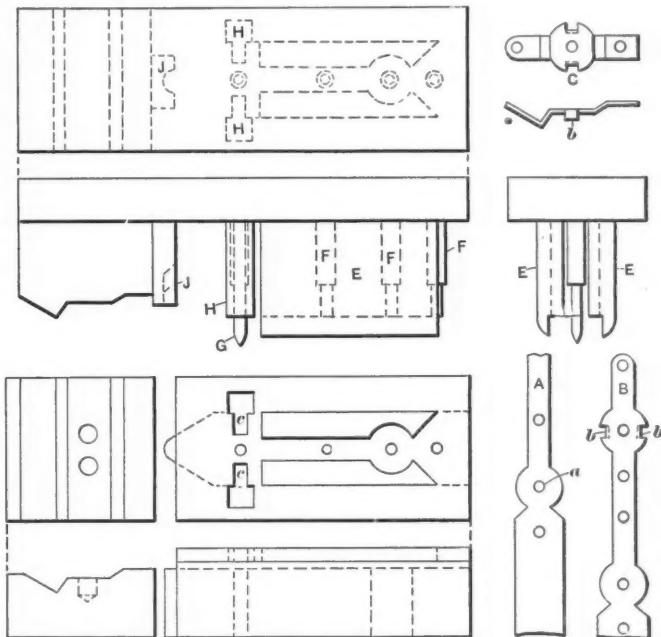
Diagrammatical View of Blanking and Forming Die for Producing the Piece shown at *C
